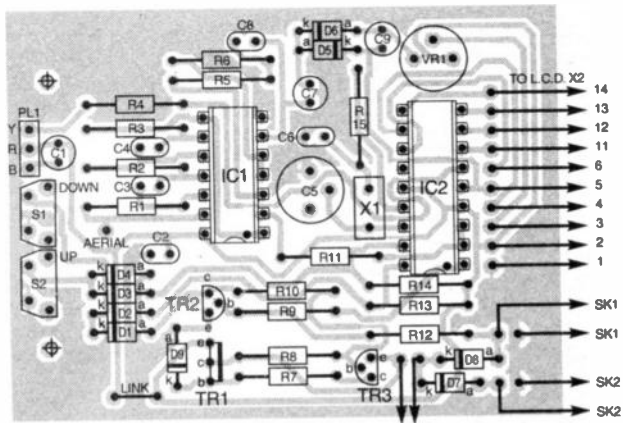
Printed circuit board component layout and full size underside copper foil track master pattern.
